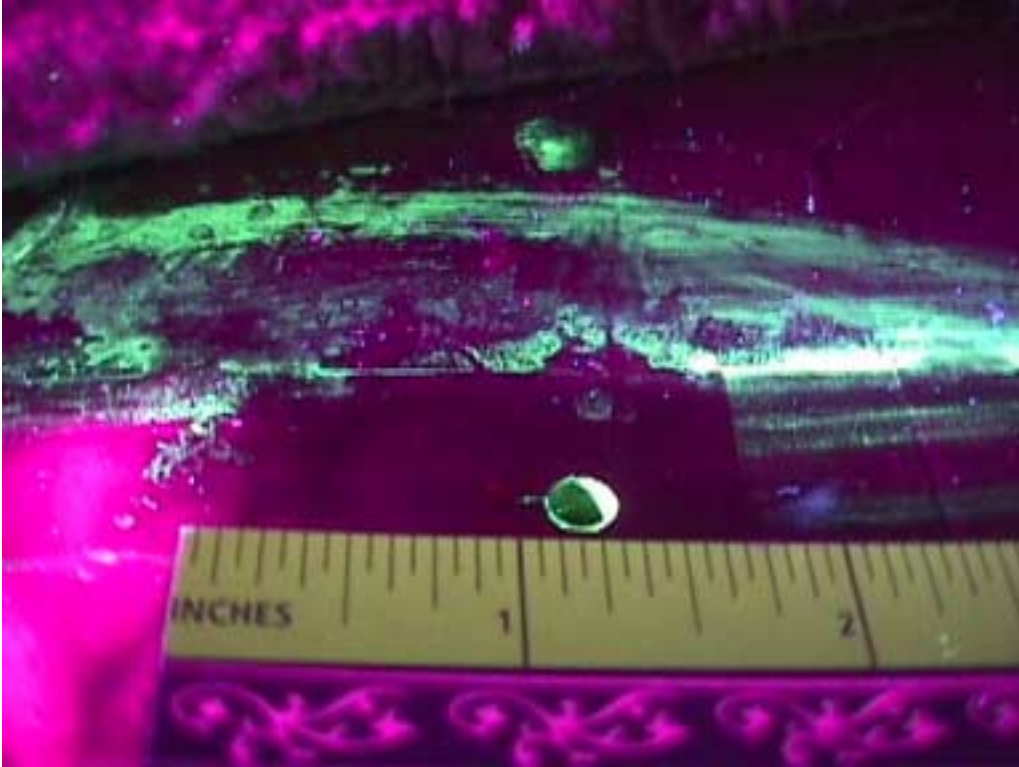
thru figure 6 show all cracks under the external doubler panels and their locations, Figures 3 thru 6 are enlargements of figure 2
